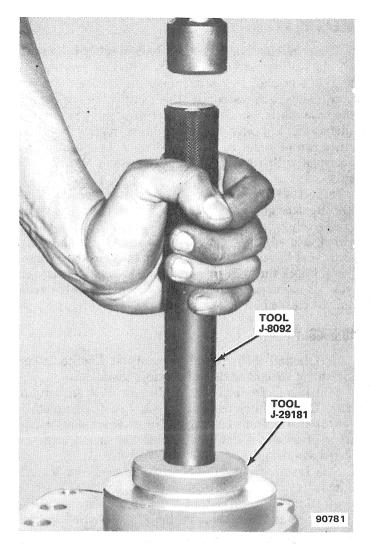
D-84 Front Output Shaft Front Bearing Race Installation
